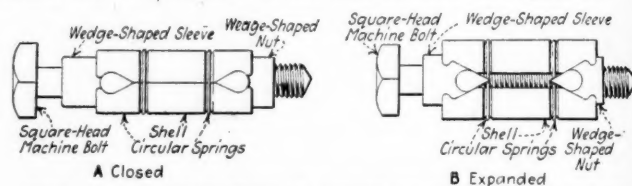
DOUBLE-SPREAD TYPE OF EXPANSION BOLT
